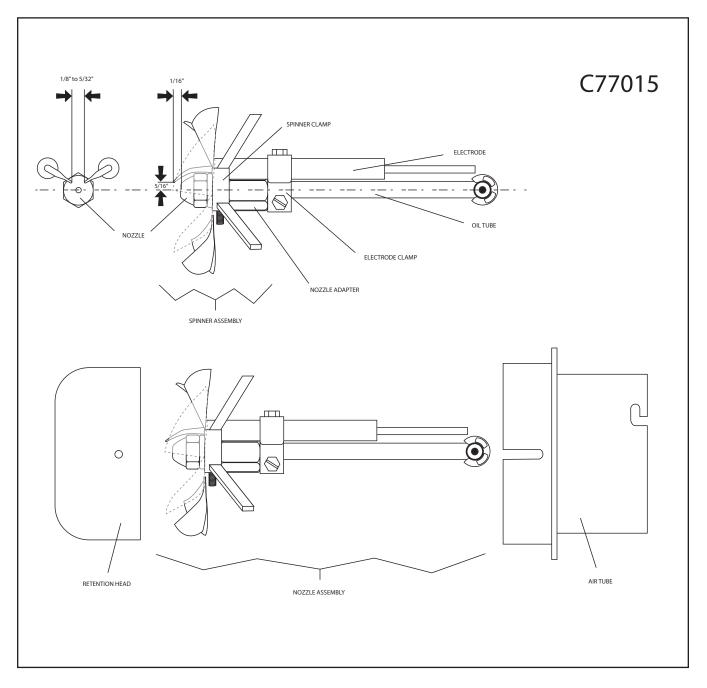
A: INSERTING / REMOVING NOZZLE HEAD ASSEMBLY
